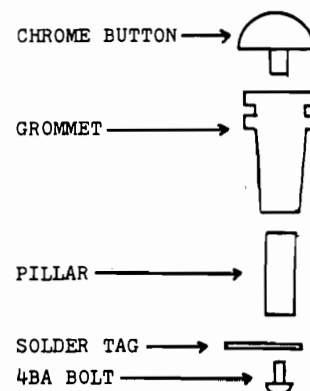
ASSEMBLY OF TOUCH TRIGGER
